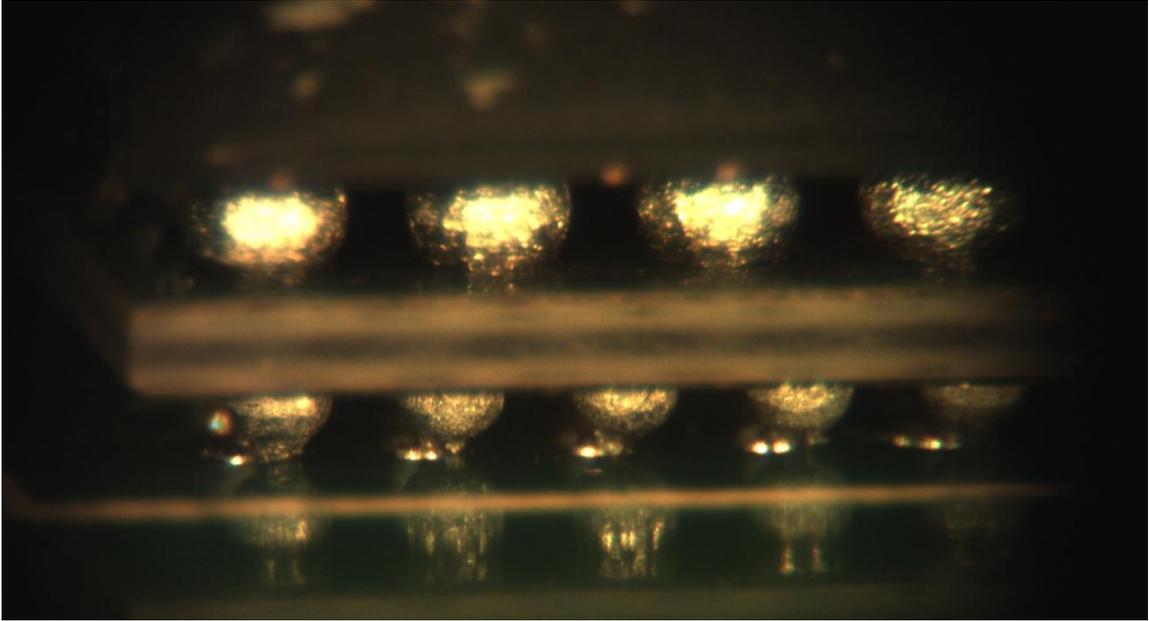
Solder reflow defect : Sliding of the package owing to high warpage due to thermal shock
